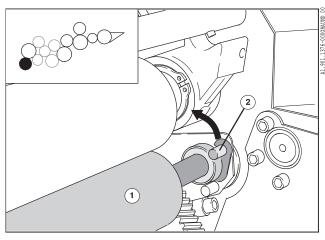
Remove the 3rd inking form roller, bearing O.S.
